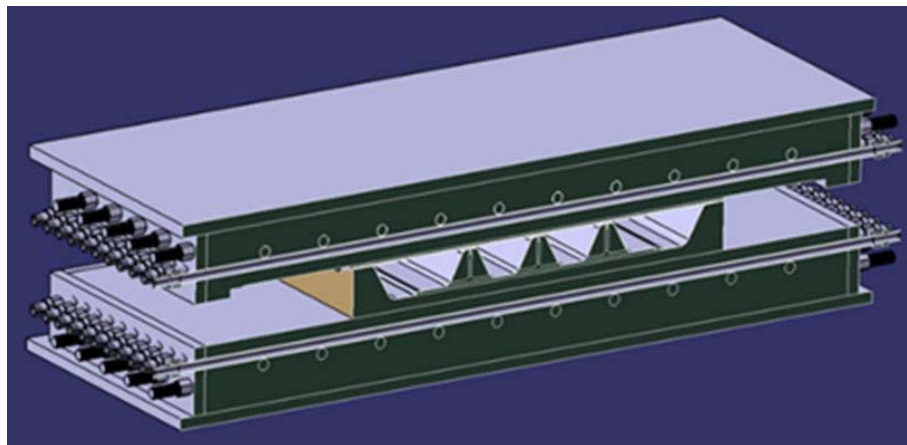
The tool stack-up is loaded into the flat ceramic tooling
